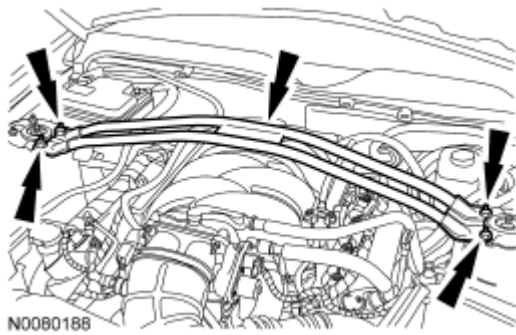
Locating Strut Tower Cross Brace & Nuts
